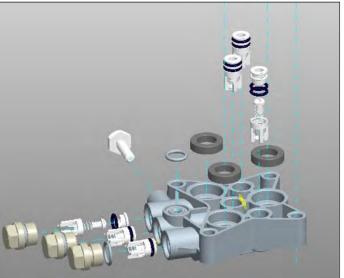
is showing the pump after opening the cylinder head from the cylinder block.
